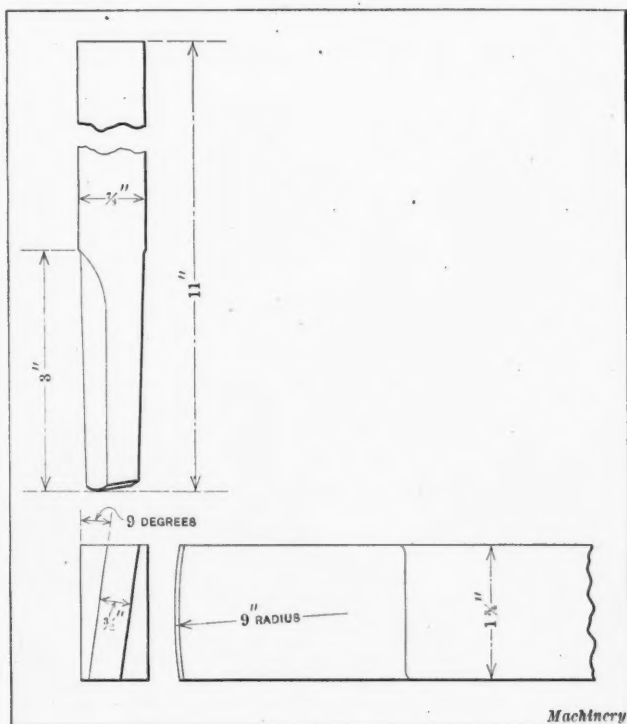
Shearing Type of Tool used for the Performance of Finish-planing Operations on Steel
